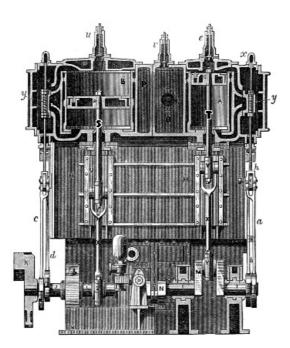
Compound Marine Engine. Front Elevation and Section.
